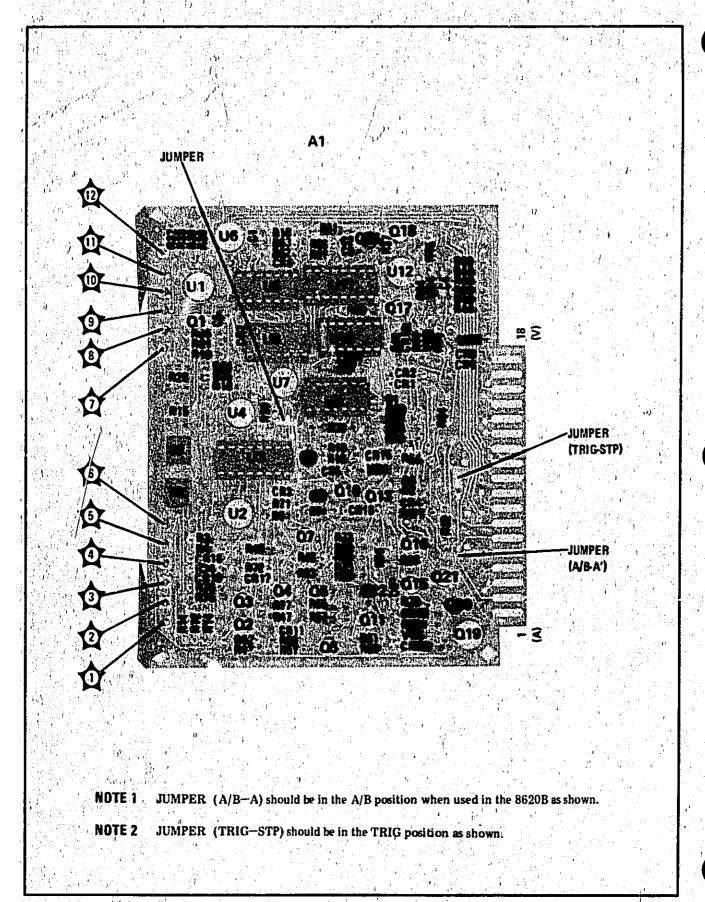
A1 Sweep Generator Assembly, Jumper Position
